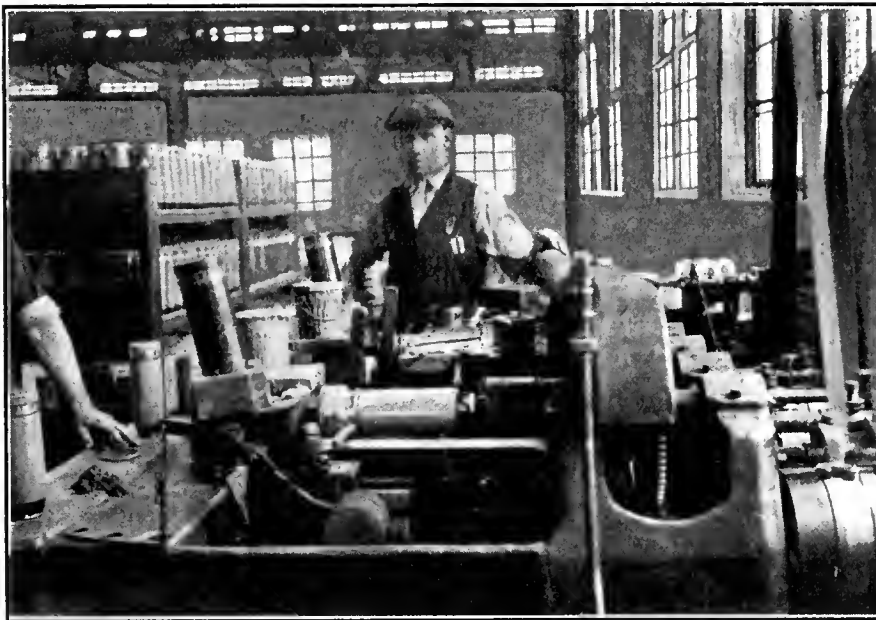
PAINTING ON A STATIONARY MACHINE.
